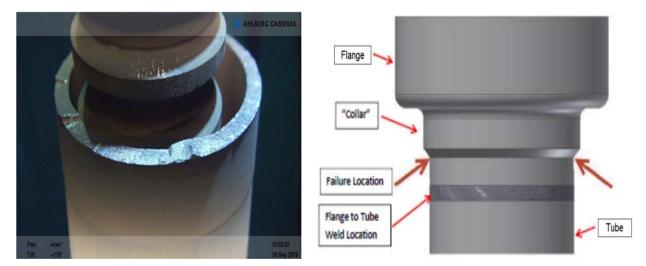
Thermal Sleeve Flange Failure Location
